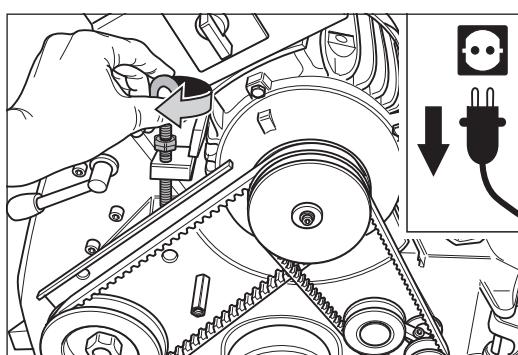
Put the V-belts back on and tighten them with the tensioning bolt at the motor.
